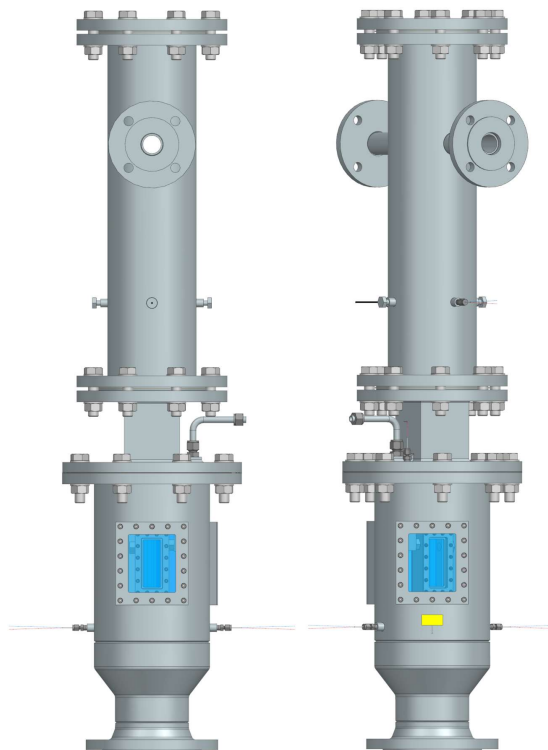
PDPA Test setup assembly (view from both windows on the setup).
